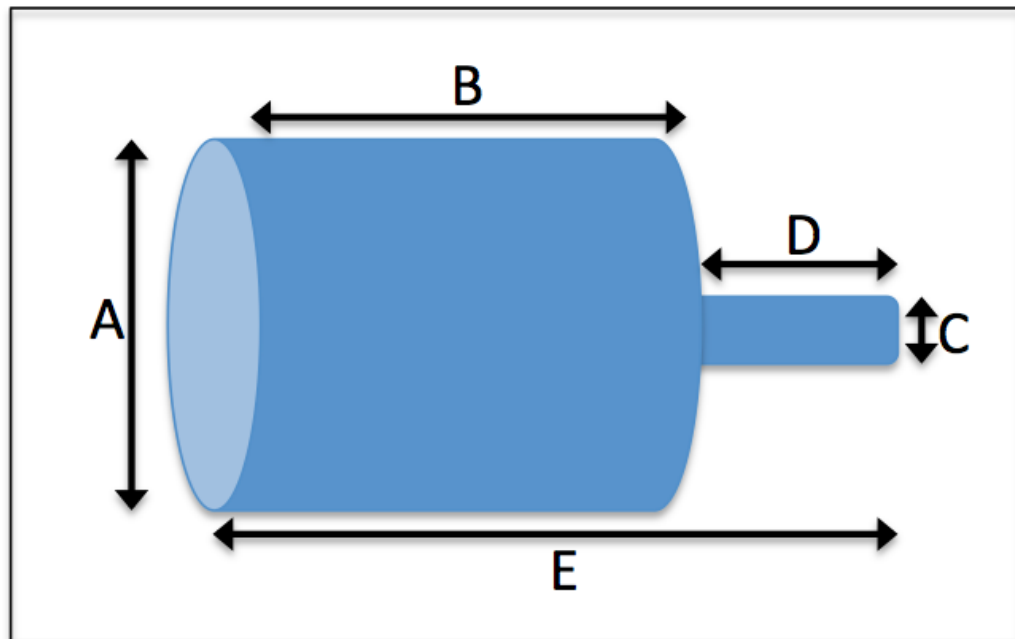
2- Motor Dimensions – Recreated With Permission of HobbyKing.com - Refer to Appendix A
